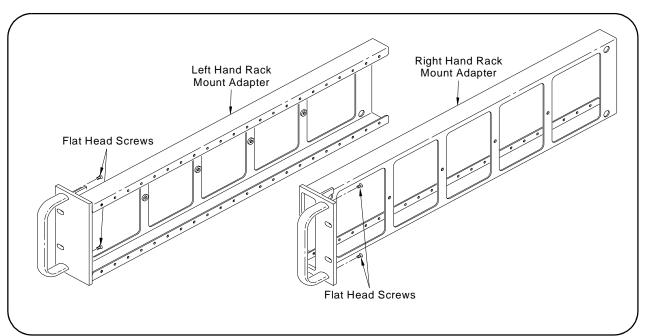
Attaching Handles to the Rack Mount Adapters
